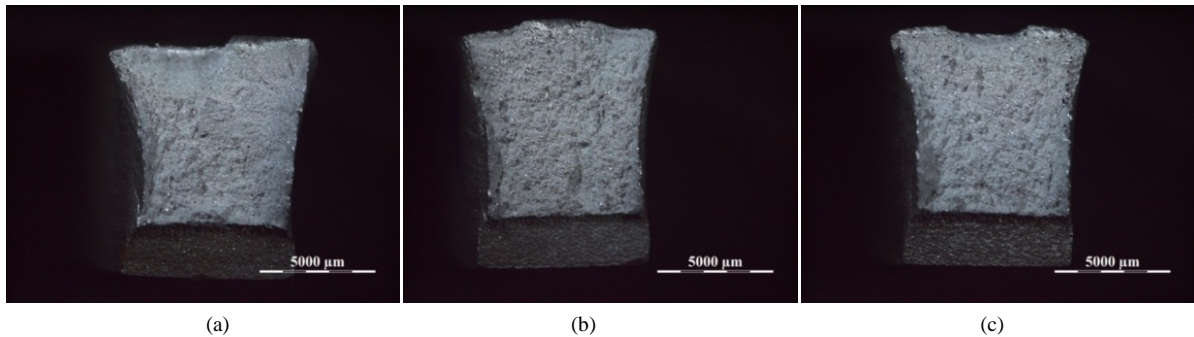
Impact fracture macroscopic morphology of weld joint. (a) Test sample a; (b) test sample b; (c) test sample c
